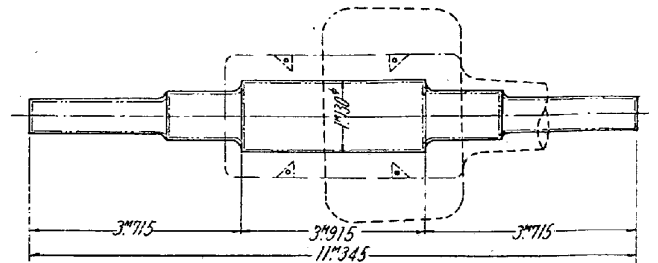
An example of rotor shaft forging (original ingot 75t)
